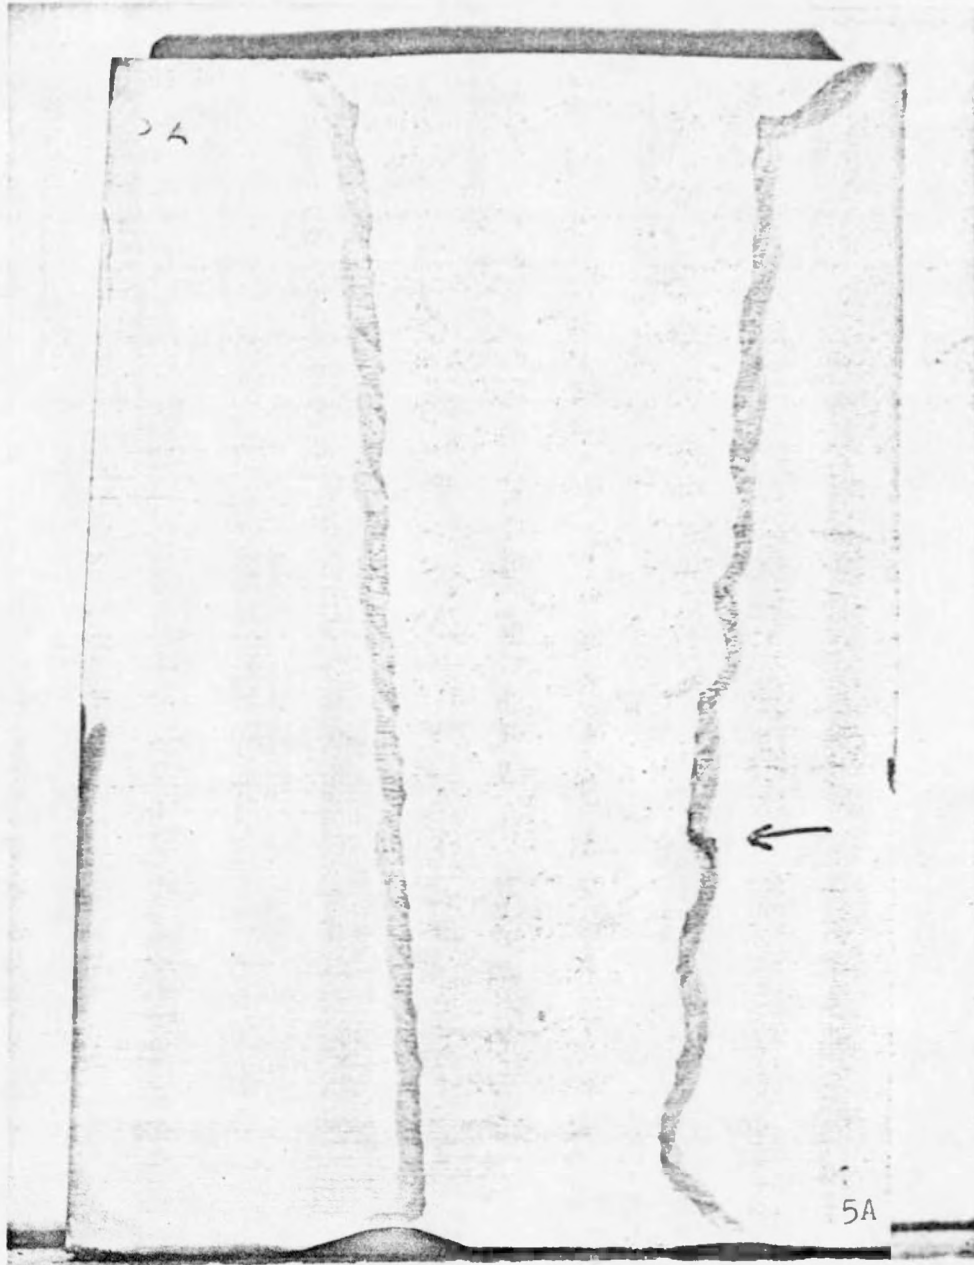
SECTION FROM CIRCULAR PATCH TEST WELD II
